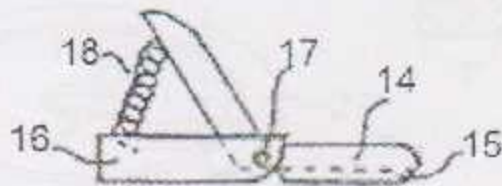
Enlarged top edge view of the gate valve assembly of the pneumatic distributor.
